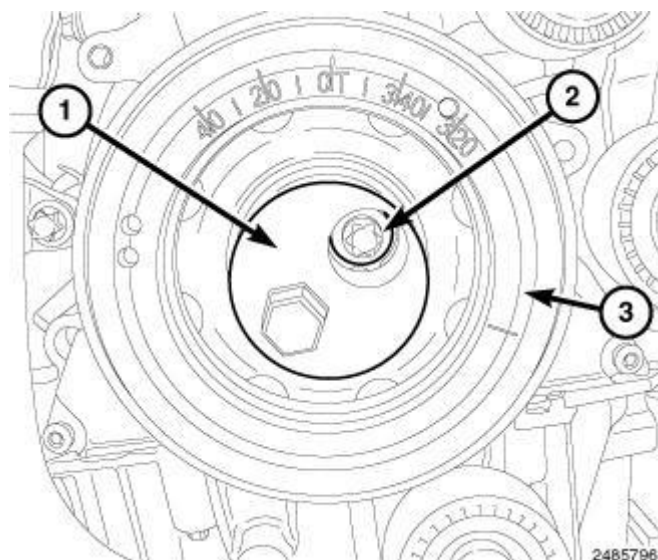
Front Crankshaft Seal Adapter & Bolts
